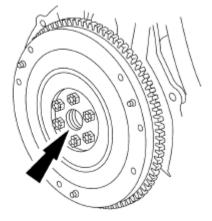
Identifying Tightening Sequence Of Flexplate Bolts Courtesy of FORD MOTOR CO.
